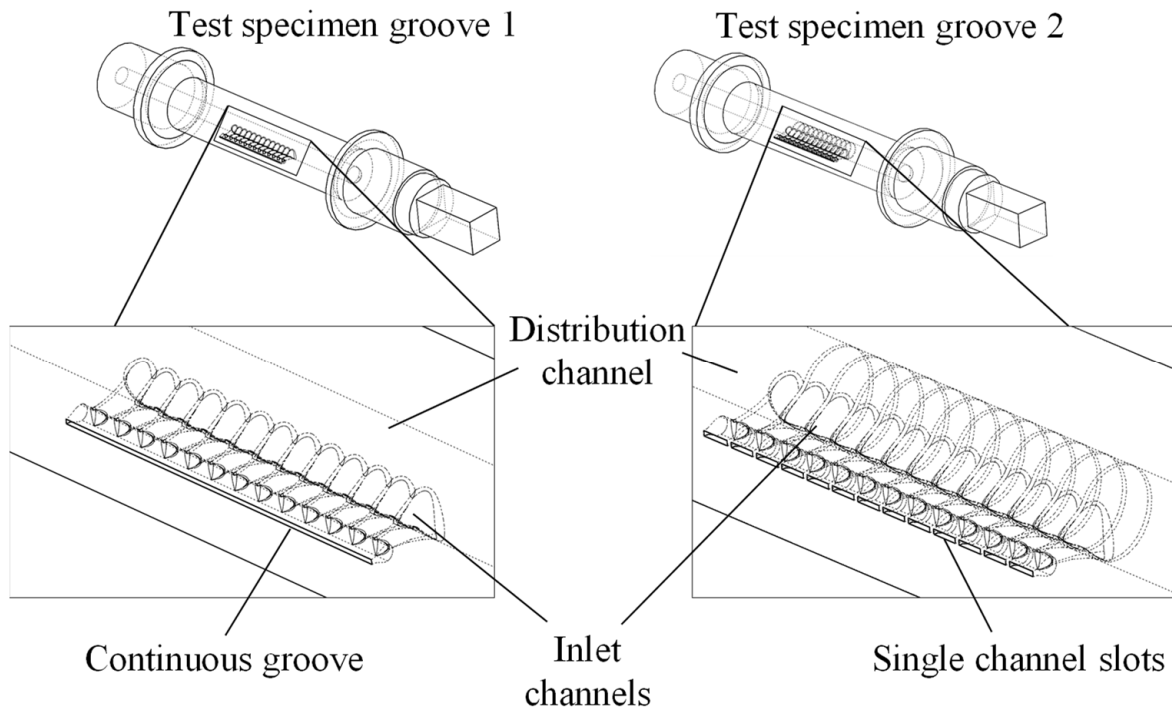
Cylindrical test specimen with different channel outlet openings for hydraulically lubricated strip drawing tests.
